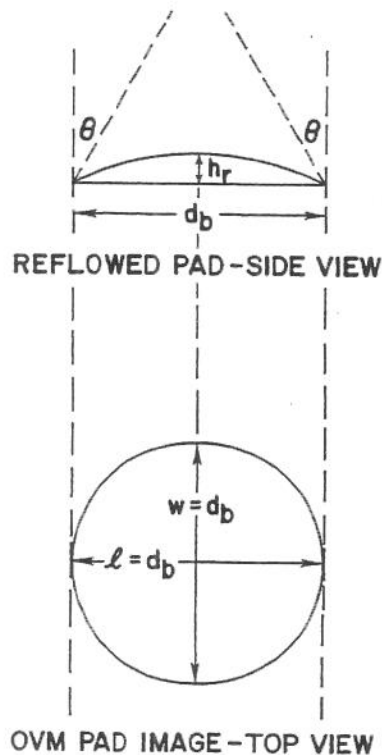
Pad and pad image for solder ball which does not cast a shadow
